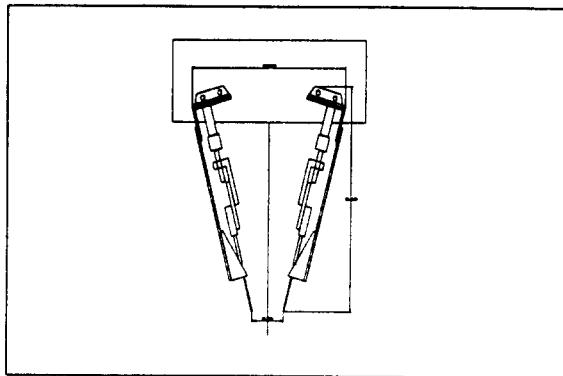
Schematic drawing of the angled-cylinder type gripper.
